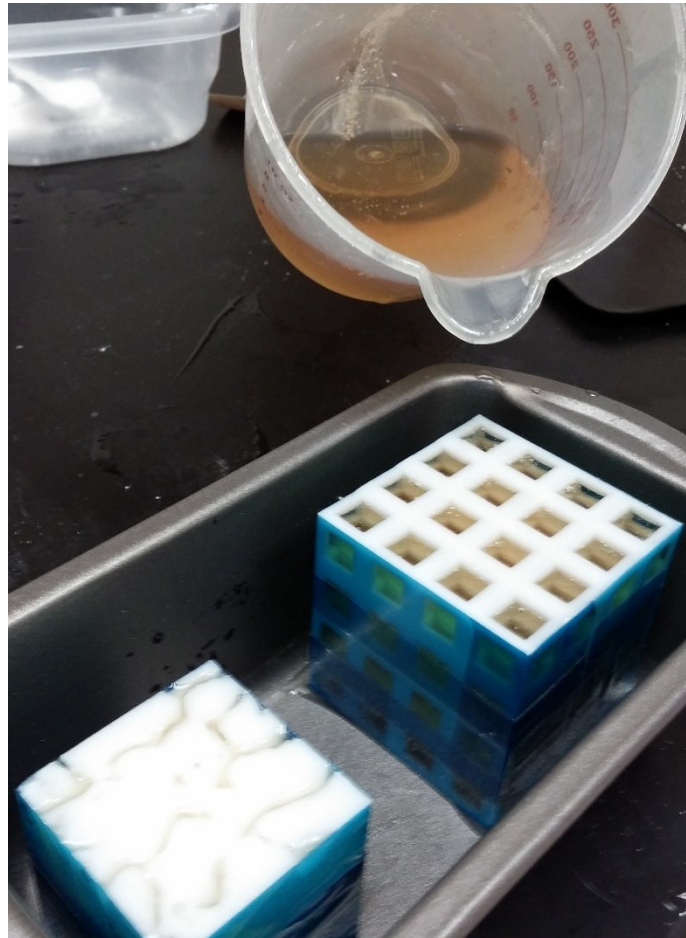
Pouring liquid epoxy in a reverse trabecular mold and in a rectangular prism assembly
